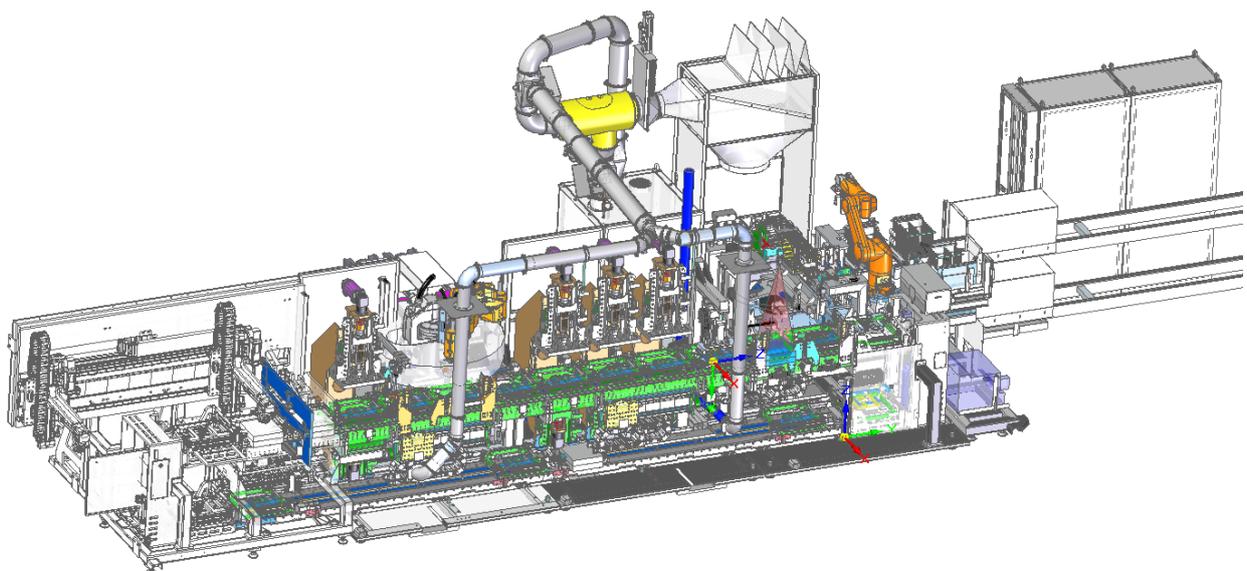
Pouch Cell Packaging Machine, MANZ AG Manz.com
